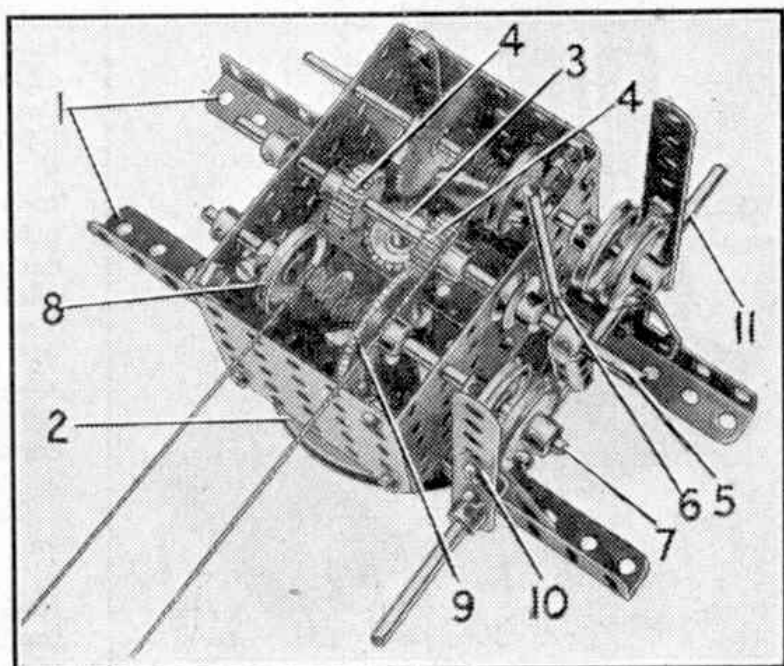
A simple gear-box suitable for transmitting a drive to the chassis of a mobile crane and also operating the hoisting movements.
